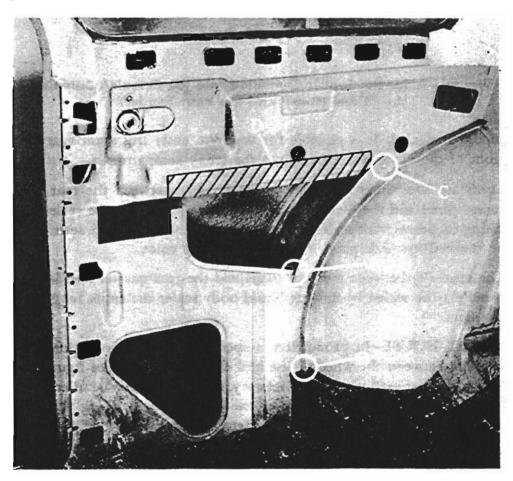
Club Sedan Rear Quarter Inner Panel Without Water Shields Installed.
